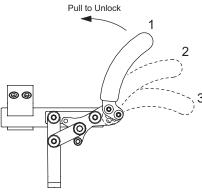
Standard Handle Positions 1, 2 and 3 Locked
